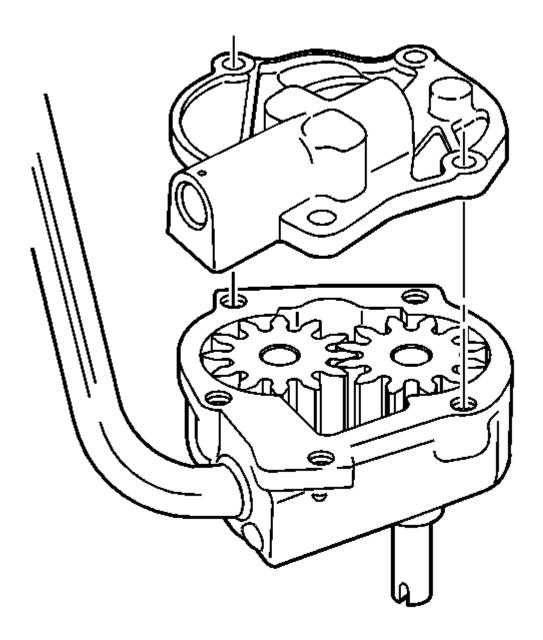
View Of Pump Cover Courtesy of GENERAL MOTORS CORP.
